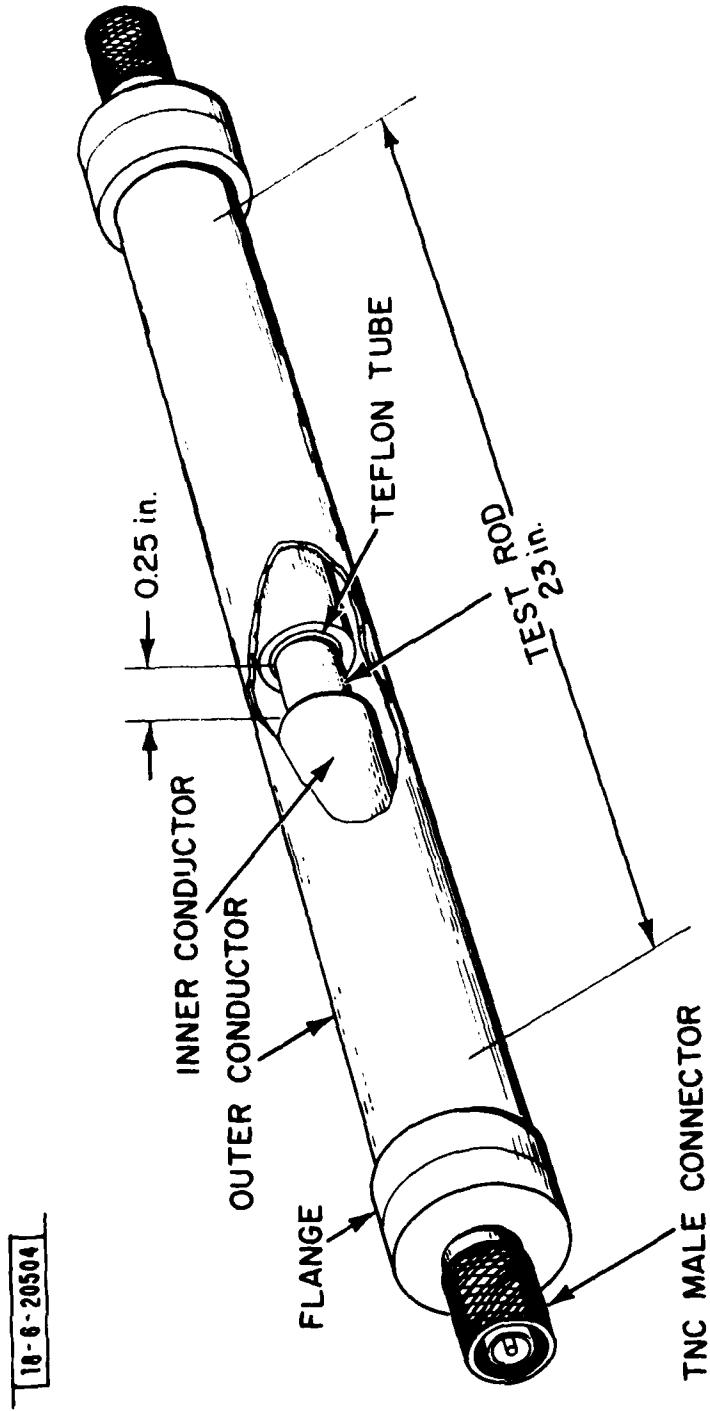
Cross-sectional view of the conducting material IM test fixture.
